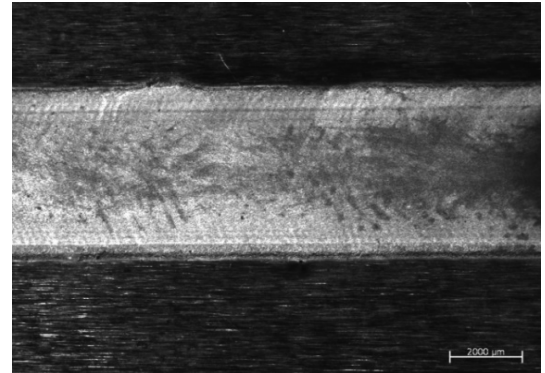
View of the transformed layer after melting HS6-5-3-8 steel, laser power 1.4 kW.
